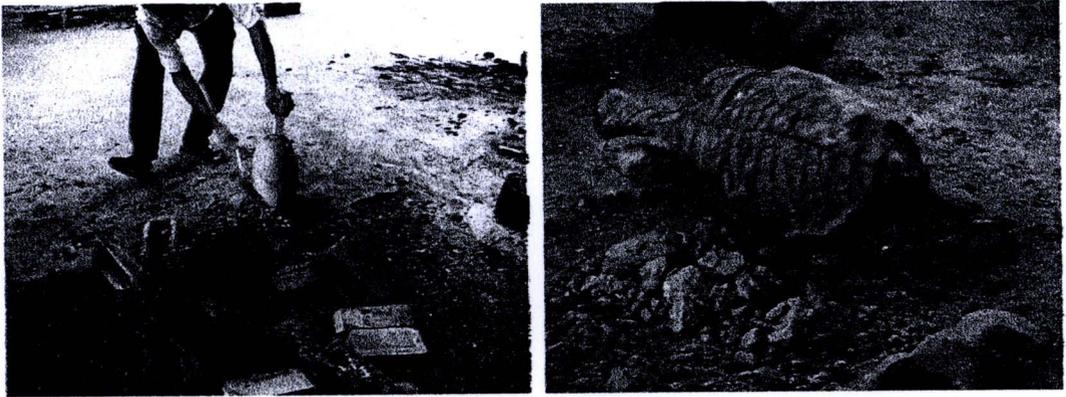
Breaking the mould revealing the layers of burnt clay and sand plaster.
